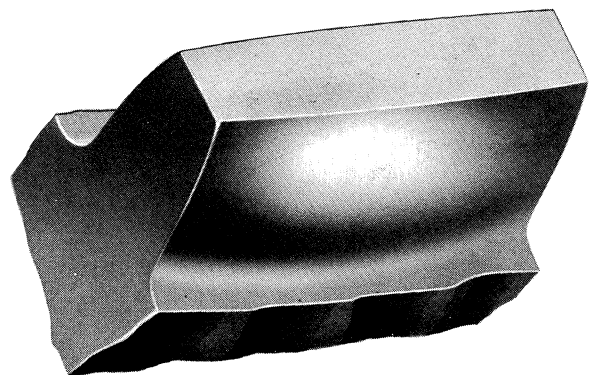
The Red Ring Elliptoid (crowned) tooth form.
